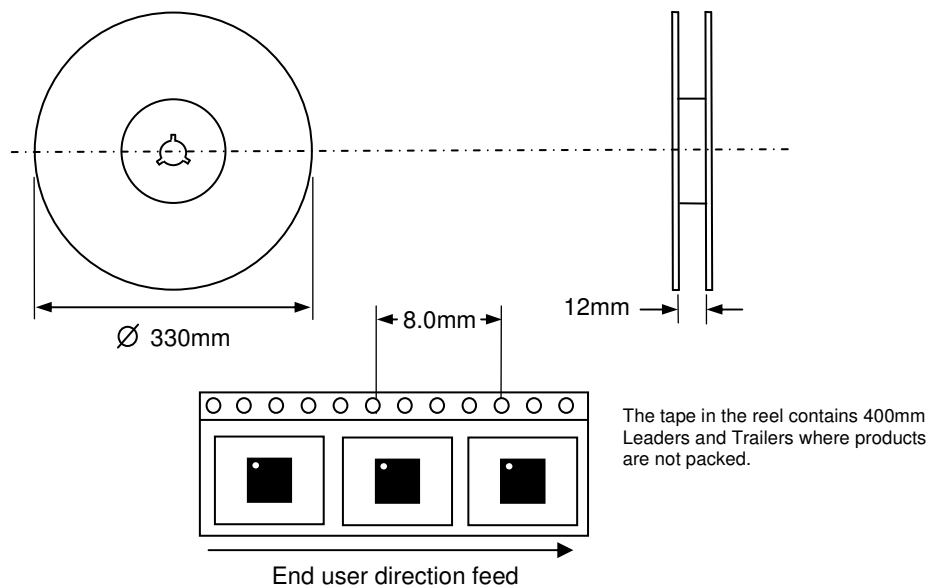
Package DimensionsTAPE CARRIER PACKAGINGFigure 5: Tape Carrier Dimensions
